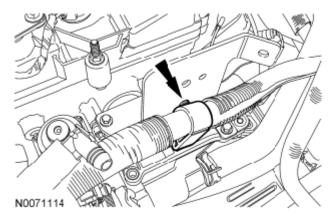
Identifying Engine Harness Electrical Connectors Courtesy of FORD MOTOR CO.
